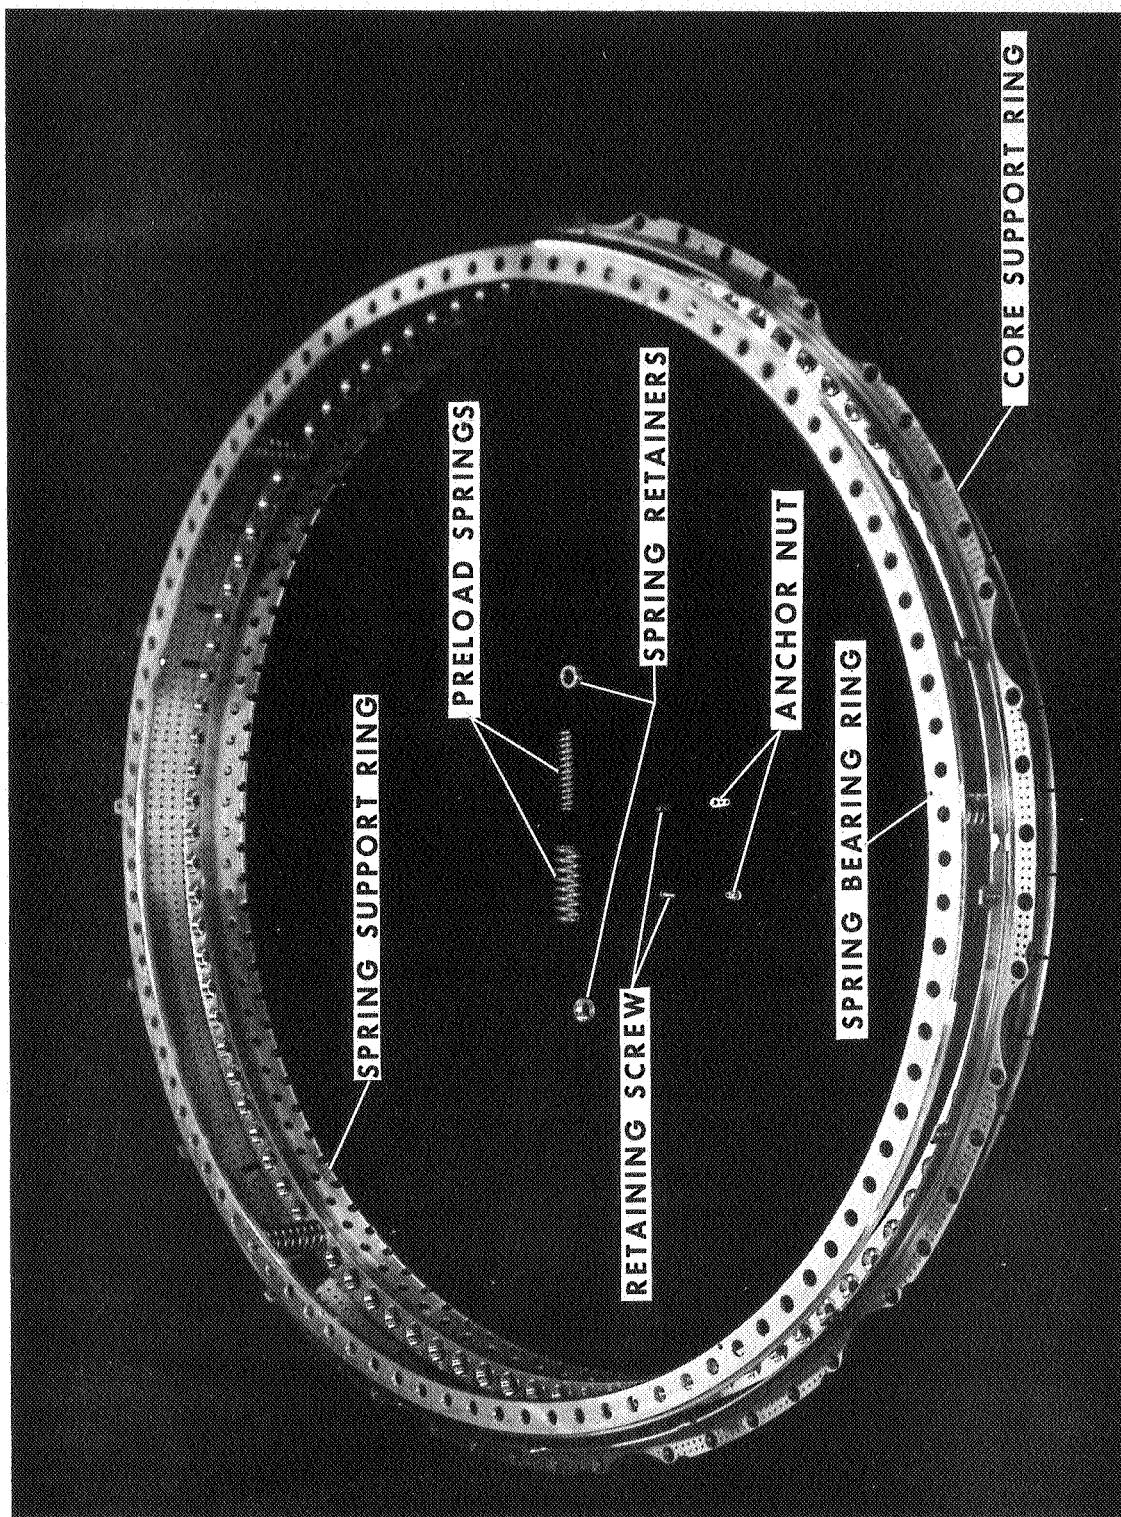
CORE ASSEMBLY AXIAL SUPPORT SYSTEM
